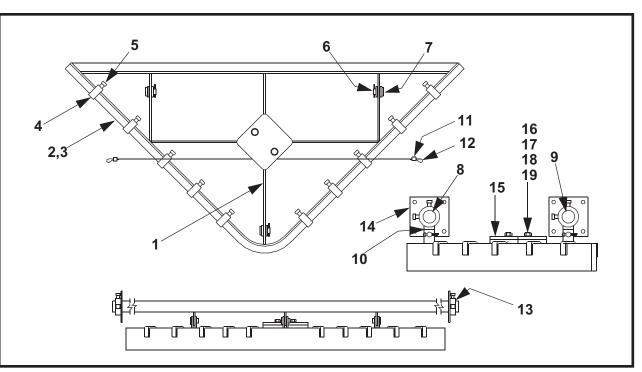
Martin[®] VPlow HD Assembly, P/N BUS14092-XXXXXXXX (18 - 48in. [400 - 1400 mm] belts)
